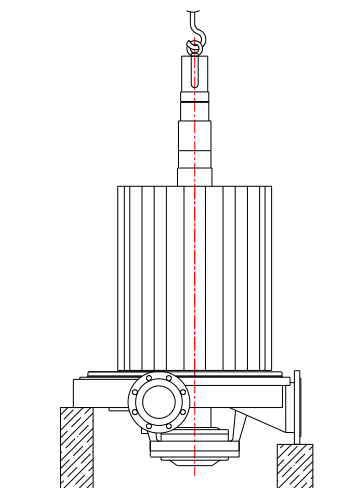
Insert the rotor into the Free end head/port plate by a ring bolt
